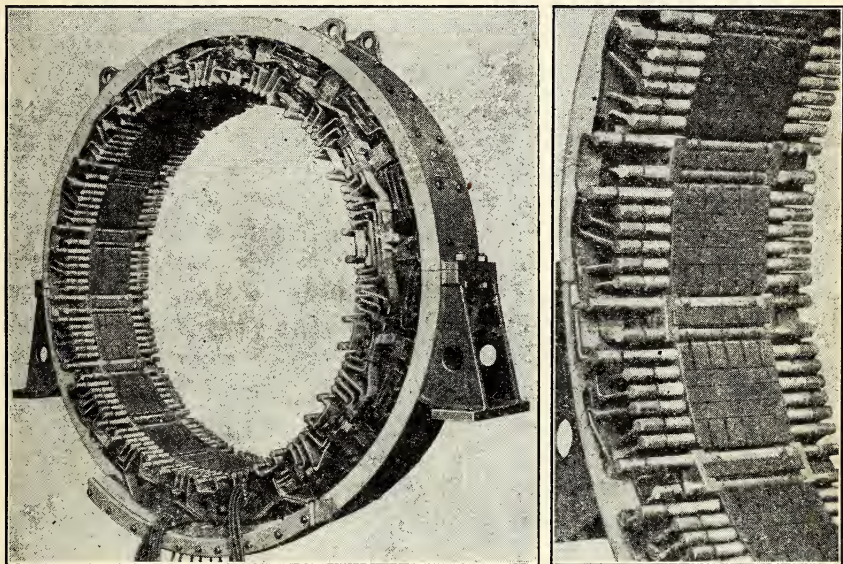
Frame of a heavy-duty rolling-mill motor equipped with a compensating, or pole-face, winding in addition to commutating poles. The right-hand figure shows an enlarged view of the pole-faces. *Courtesy of the Allis-Chalmers Manufacturing Co.
